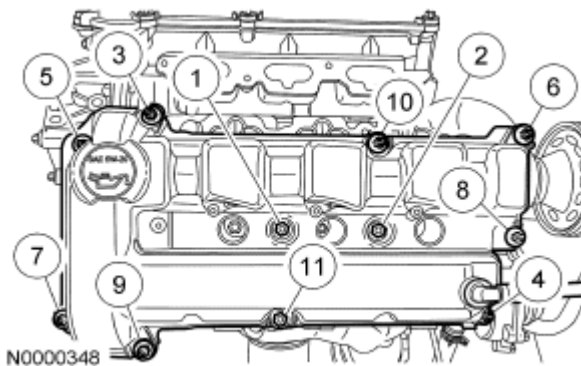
Identifying Tightening Sequence Of Valve Cover Bolts & Studs - Early Build Vehicles
